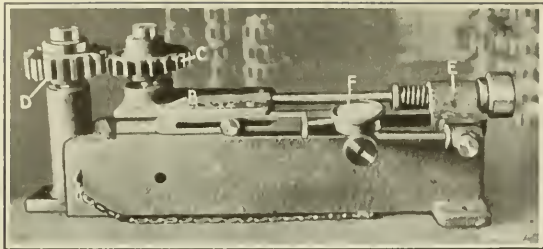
Fixture for testing Concentricity of Transmission Gears
